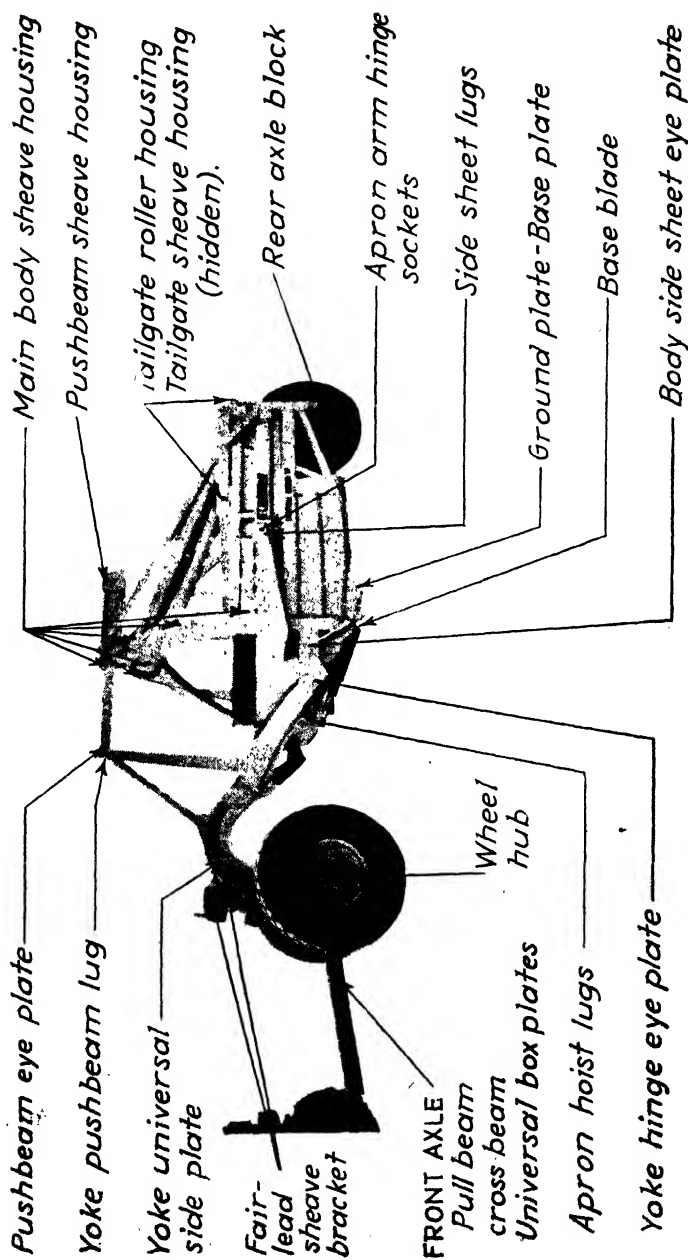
A large, all-welded earth-moving unit showing the relatively few machined parts of the machine. Most of these parts were machined as parts or small substructures prior to the welding of the parts into the final structures. (Courtesy of R. G. LeTourneau, Inc.)
